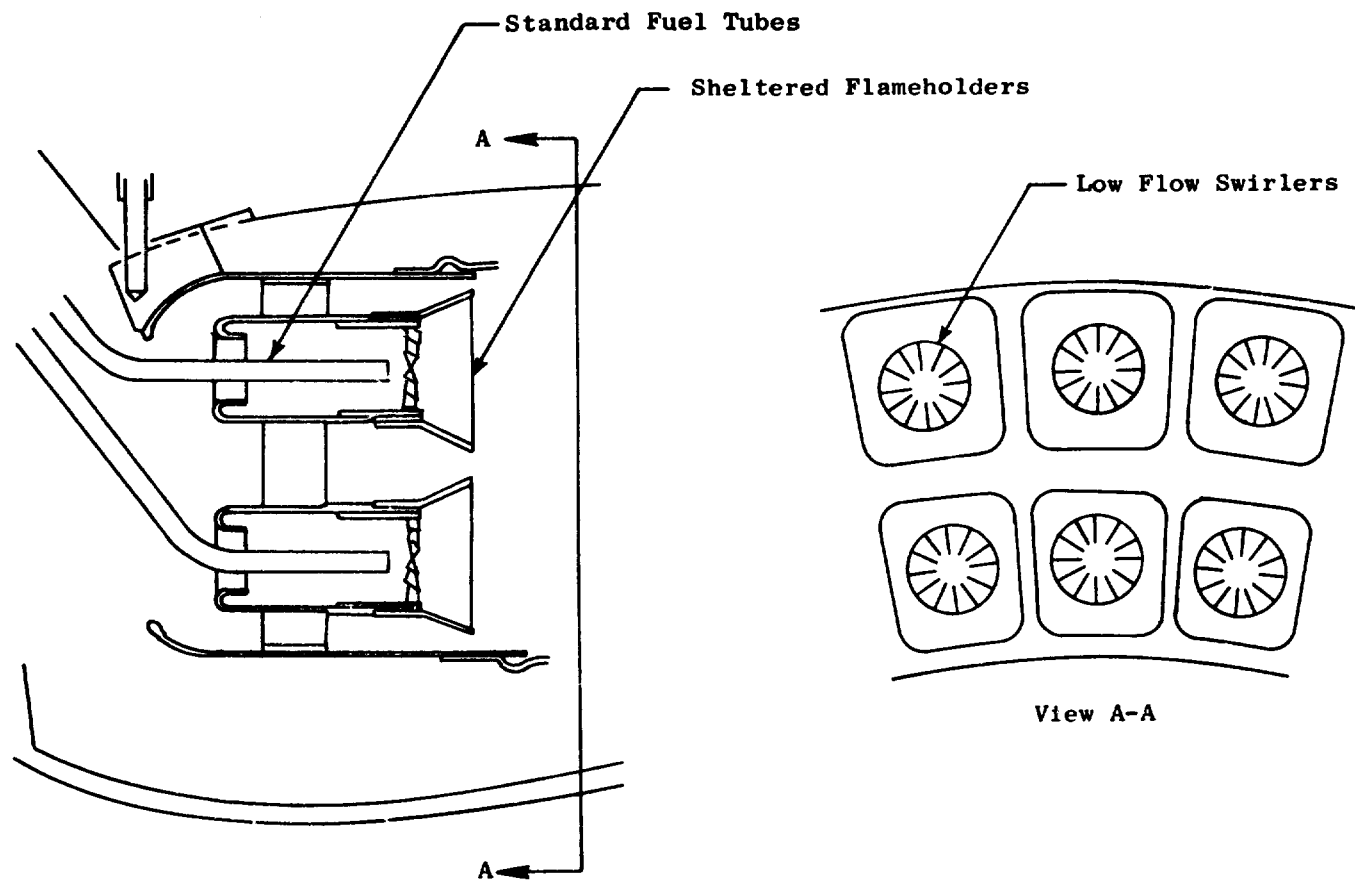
90-Swirl-Can/Sheltered Flameholder Combustor Design.
